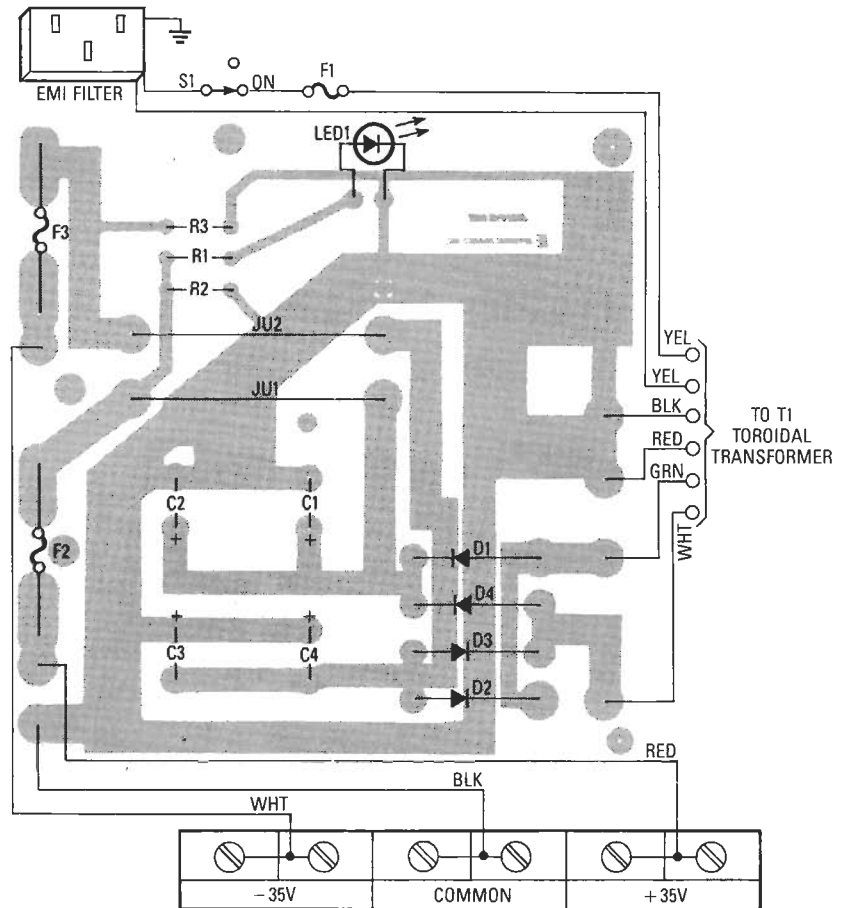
PARTS PLACEMENT FOR THE 110-VOLT AC power supply.
